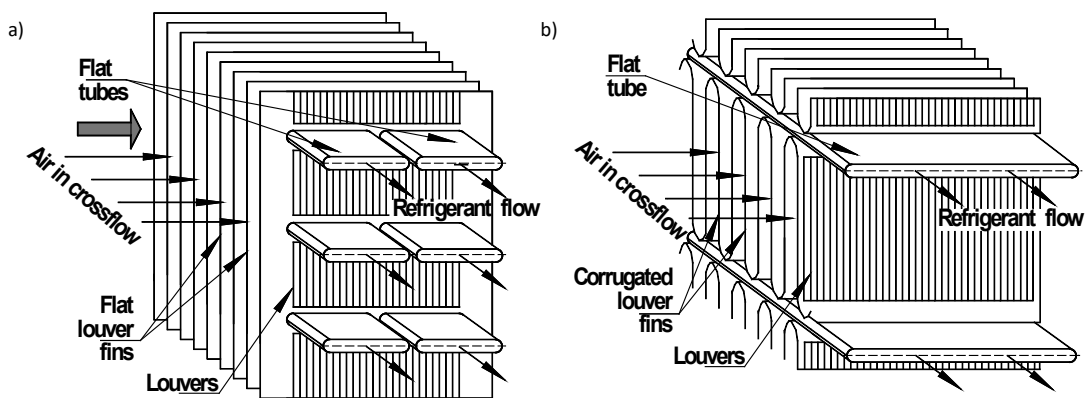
Extended plain fin surfaces of interrupted geometry with multilouver fins: a) fins on two row flat tubes, b) fins on one row flat tubes
